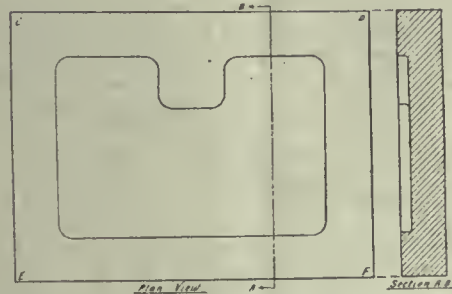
WORKING DRAWING (WITHOUT DIMENSIONS) SHOWING SECTIONAL VIEW.
